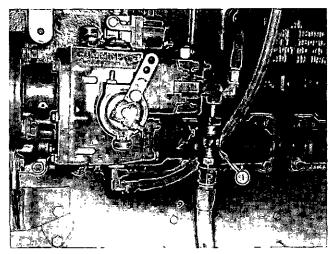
(N11964) Checking air teaks with ST-998 Sight Gauge
